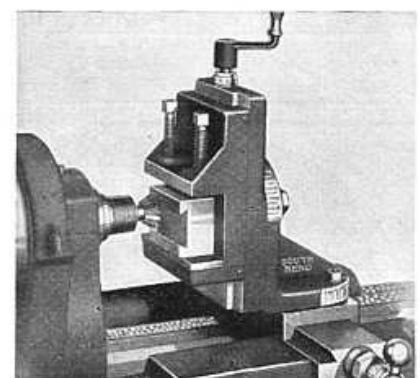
Milling and Keyway Cutting Attachment for Lathe.
